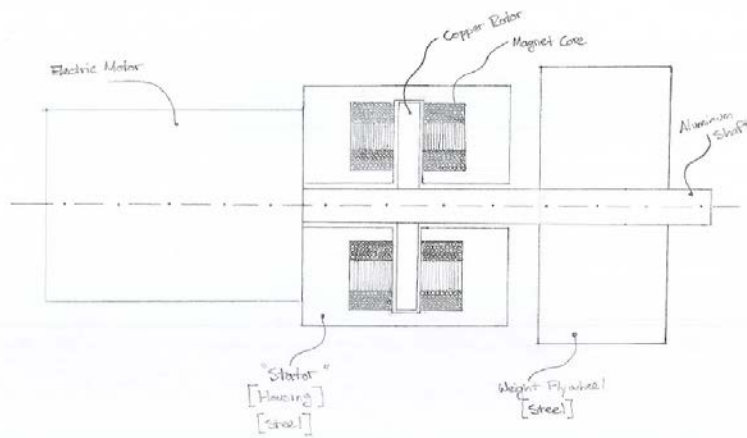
Final proposed design of electric motor and eddy current brake assembly (cut away view).
